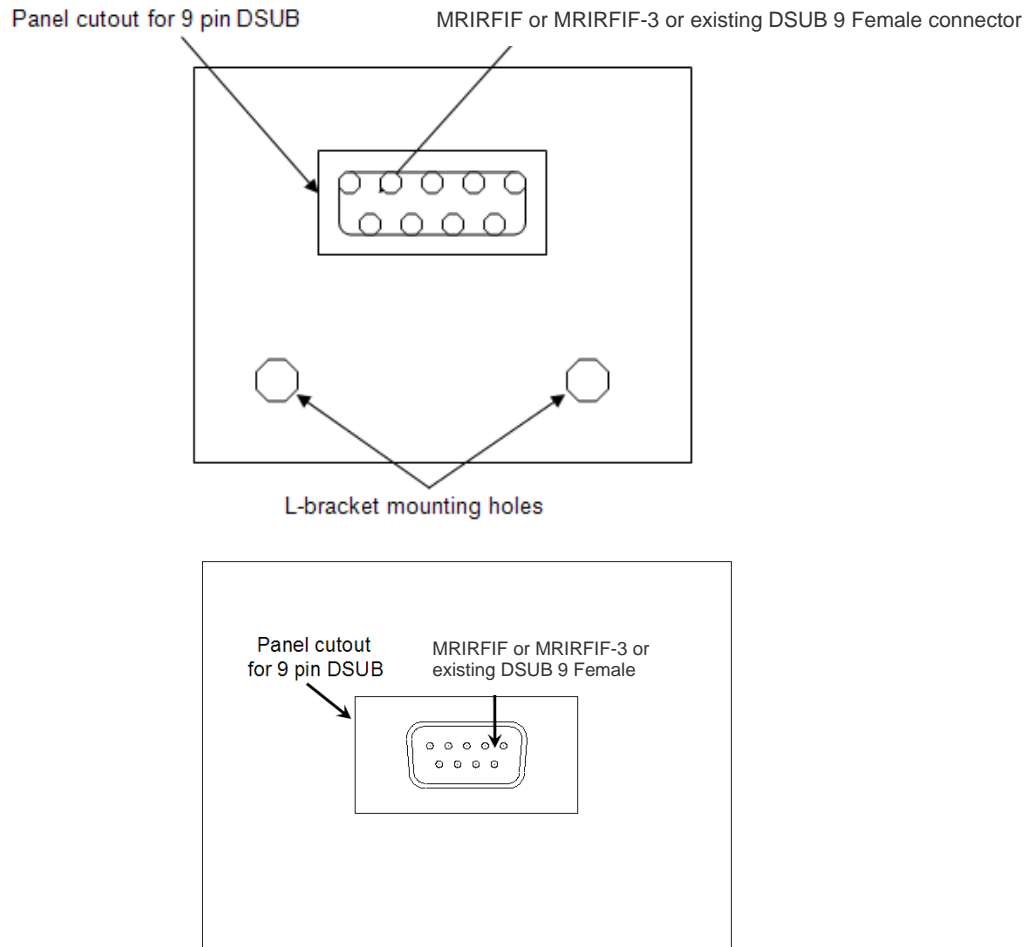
Chamber room view of cutout to support MRIRFIF mounting
